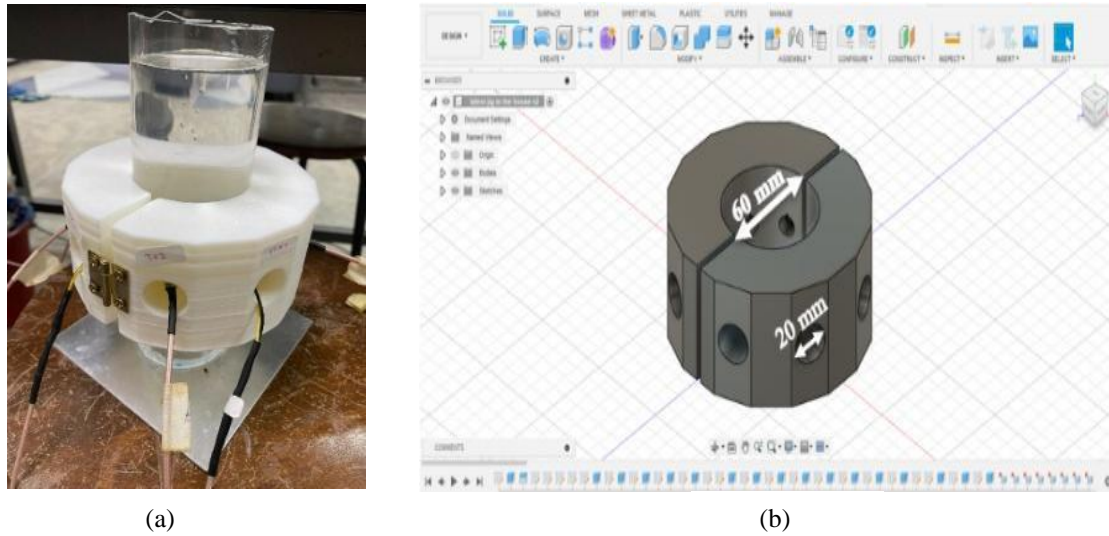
(a) Fabrication of sensor jig, (b) Sensor jig designed in Autodesk fusion software
